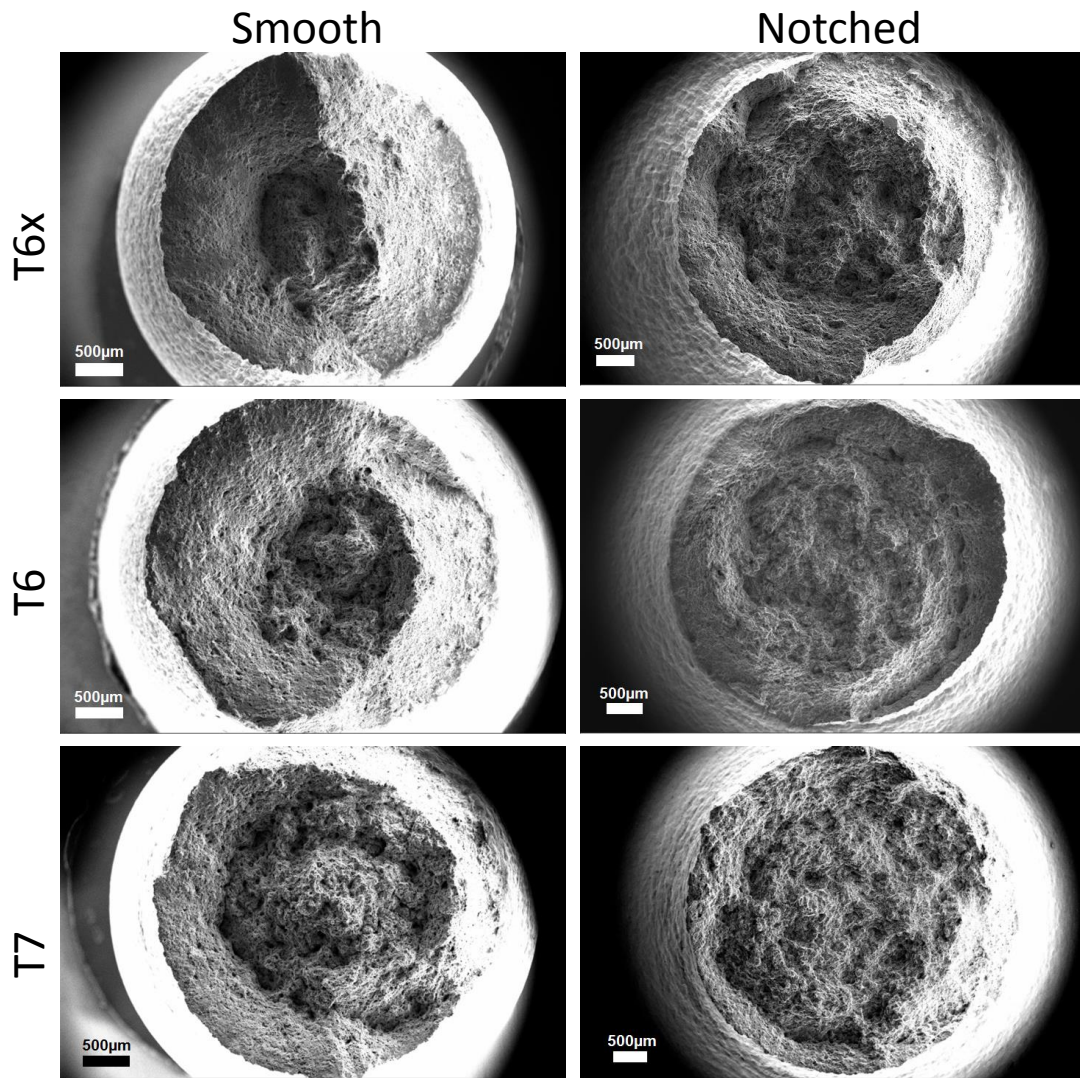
Global fracture surfaces of smooth and notched CH samples.
